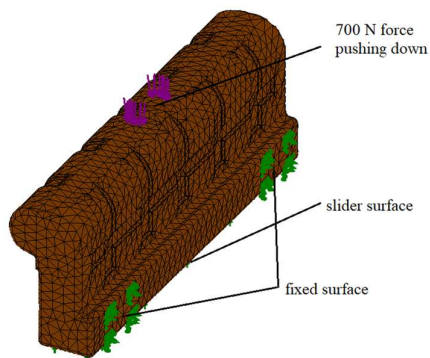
The preprocessed sofa side (mesh, fixtures and load)
